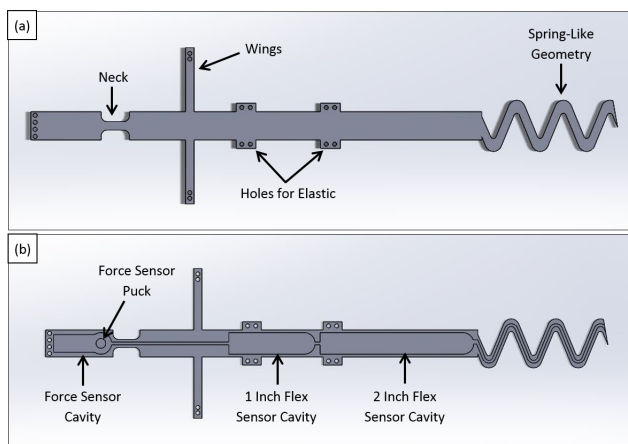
(a) The full view of the pointer finger designed. (b) A cross-sectional view of the pointer finger showing the sensor cavities and the puck location.
